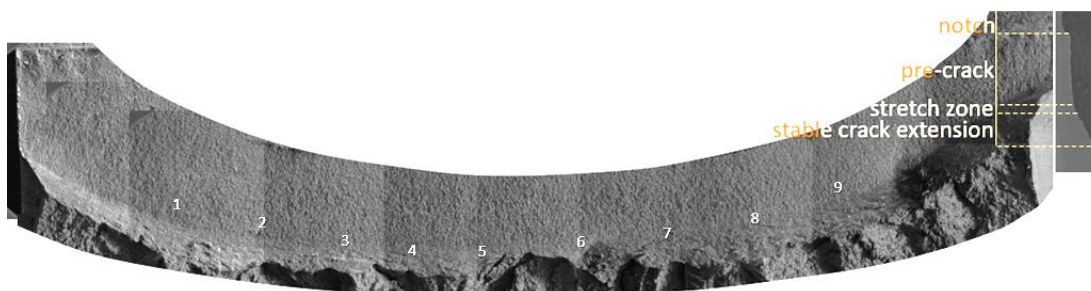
Fracture surface of a SENT specimen (PJ28).
